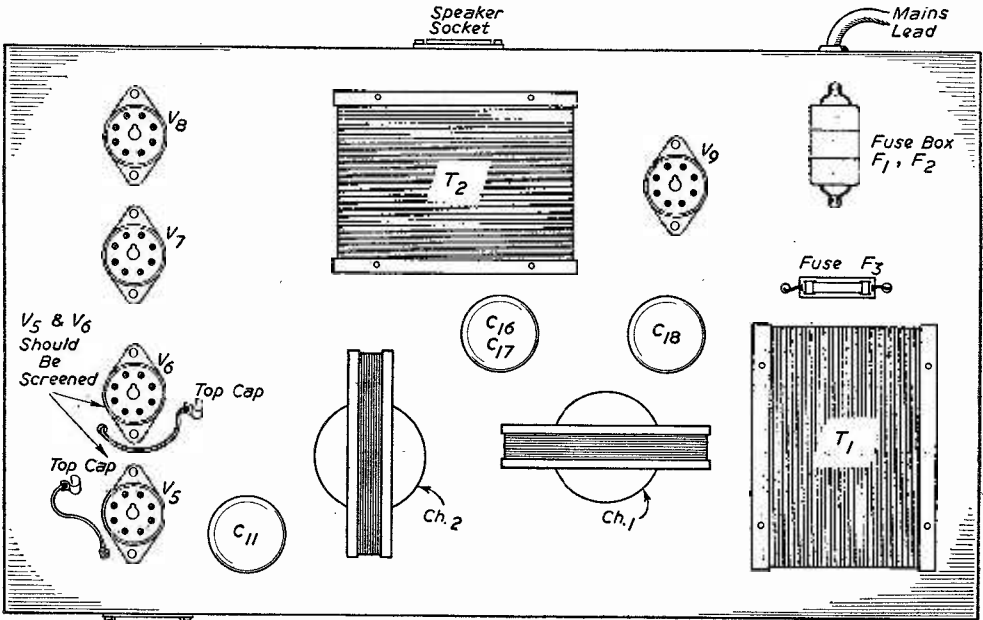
Chassis layout plan, showing how this amplifier is arranged in two sections.
